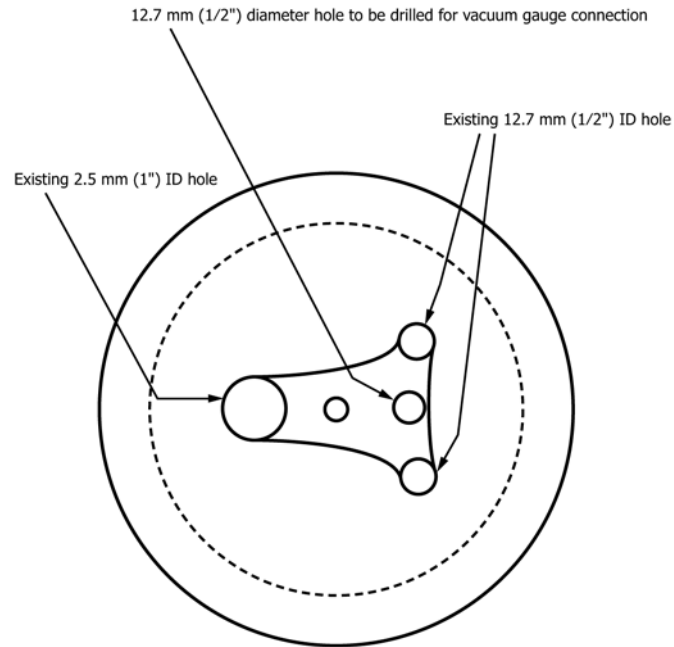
Aluminum Alloy Still Lid Showing Location of the Hole for Vacuum Gauge Connection
